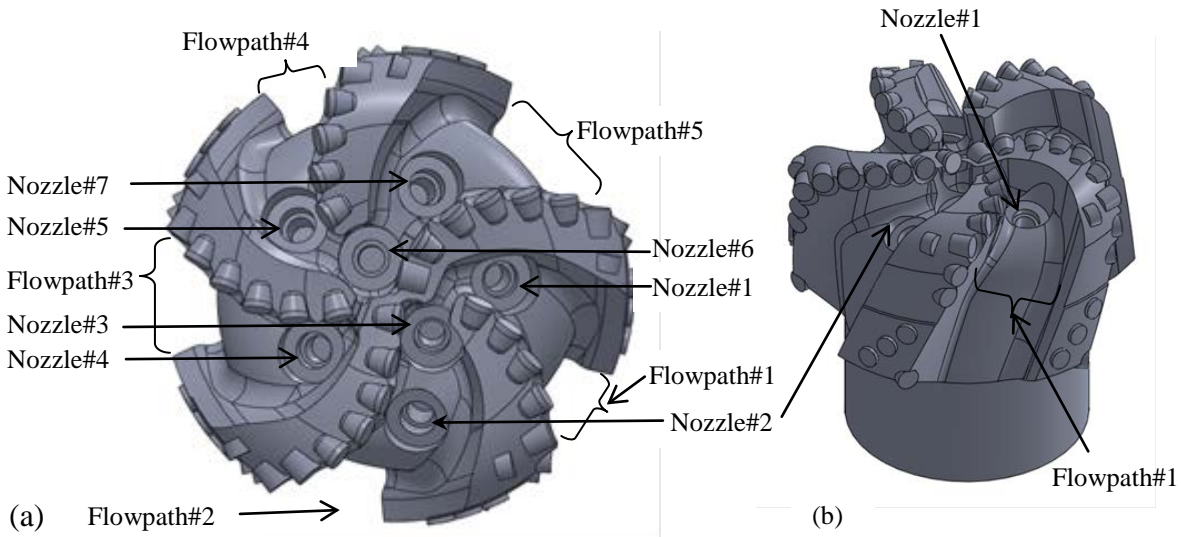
Nozzle and flow path in PDC Drill bit; (a) Bottom view of drill bit, (b) isometric view of drill bit (Hareland et al., 2009)
